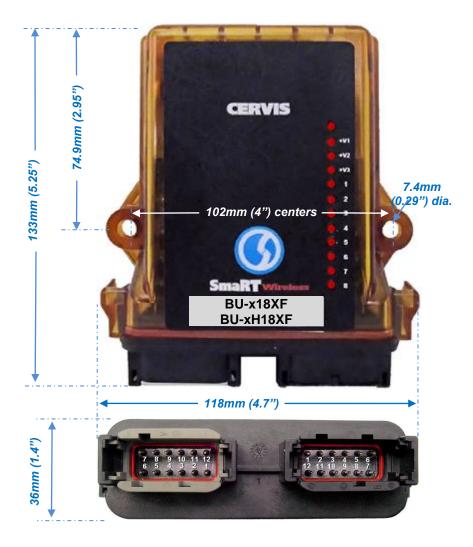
BU-xH18XF Base Unit Mounting Dimensions
